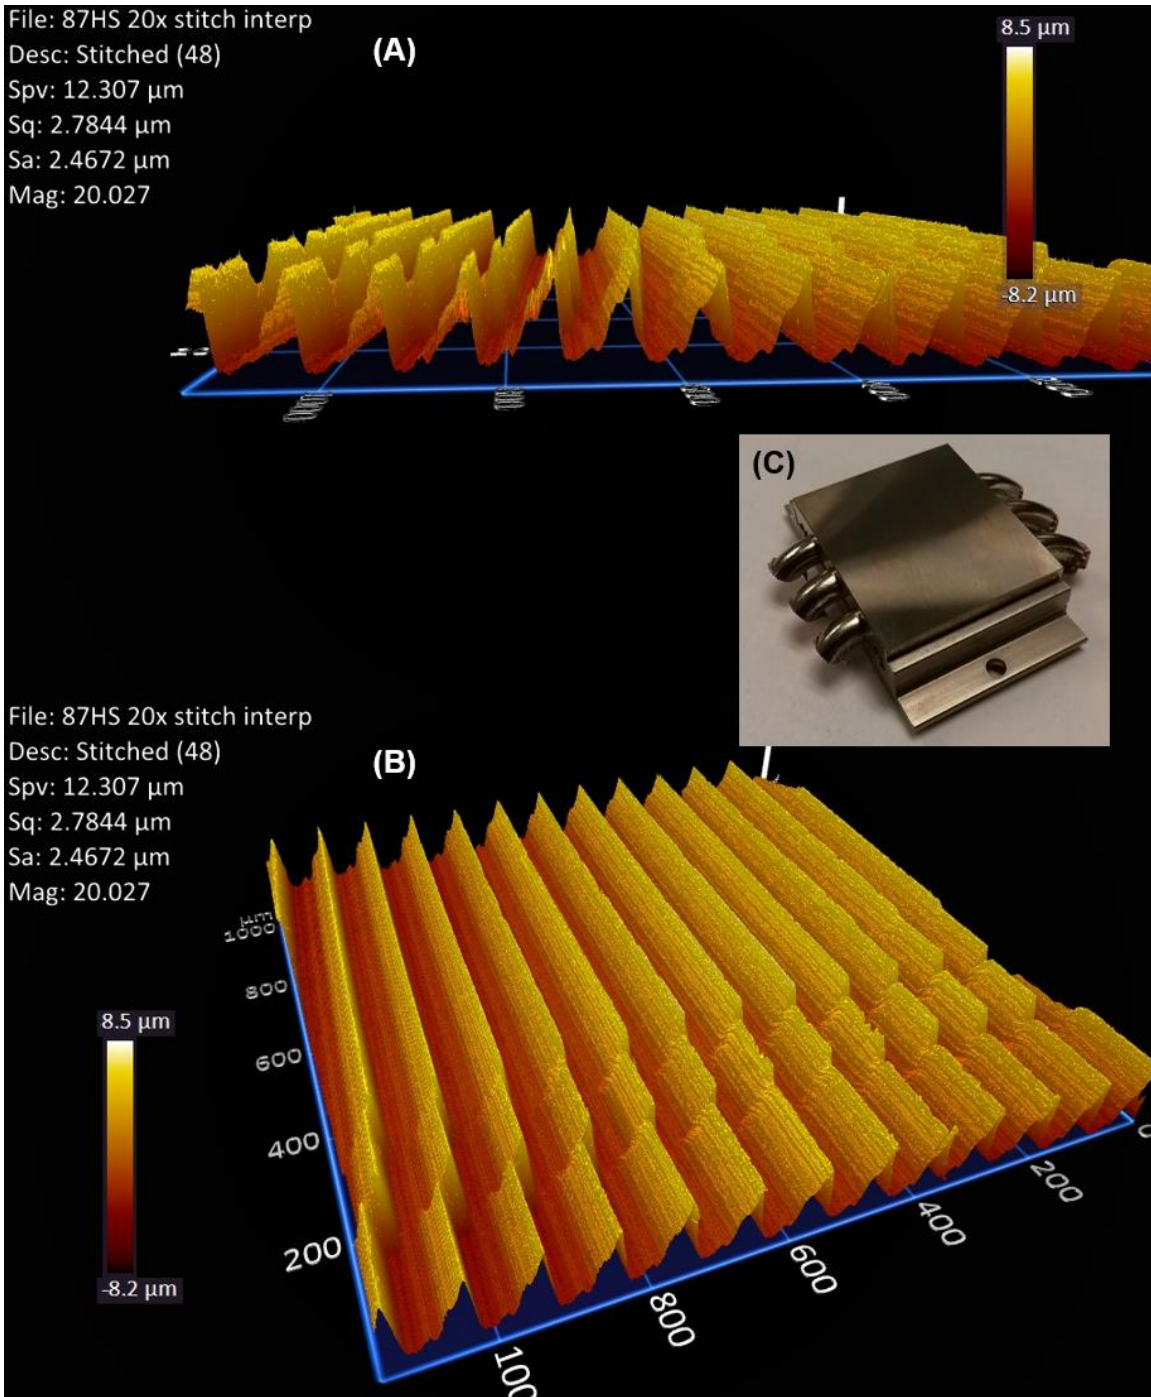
Surface profile of the machine finish (A,B) on the Cryorig H7 tower cooler heat sink along with (C) a photo.
